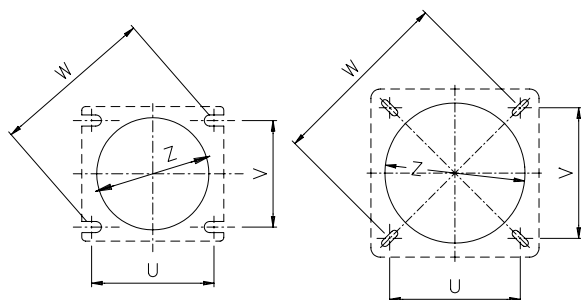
Boiler plate drilling template - Make 4 M10 threaded holes
